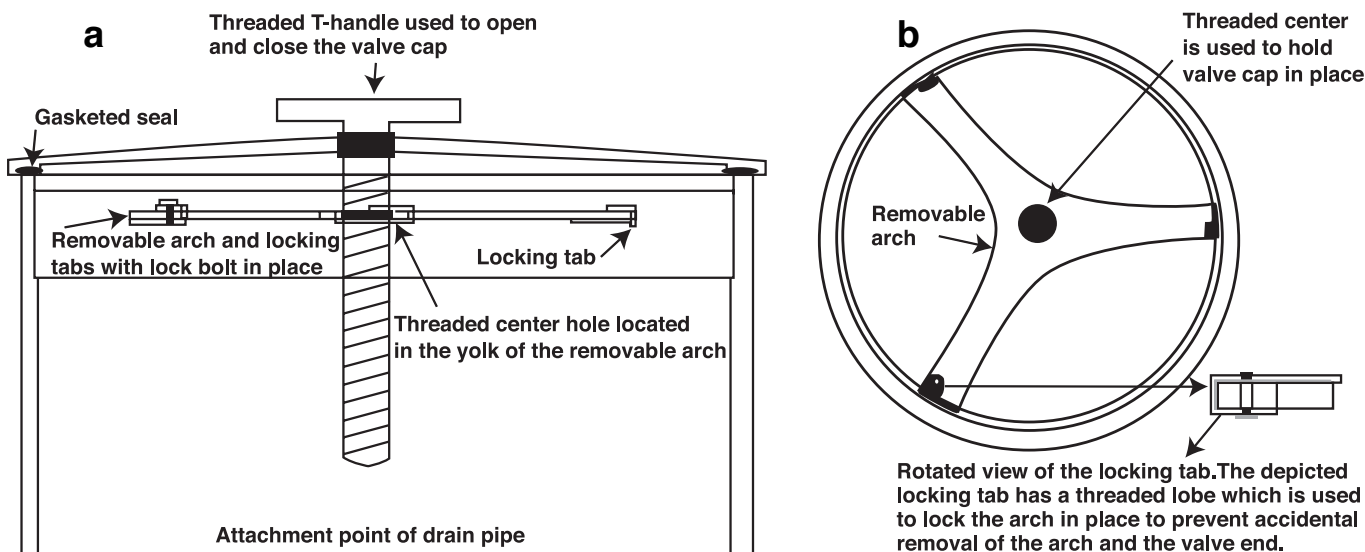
Cross-sectional side (a) and overhead (b) view of an alfalfa valve with a removable arch.
